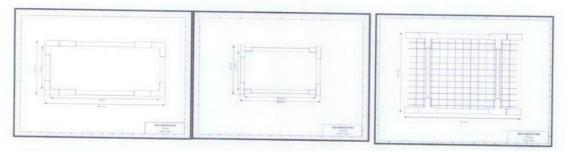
Prototype's Frame Schematic Drawing; Side, Front and Top View
